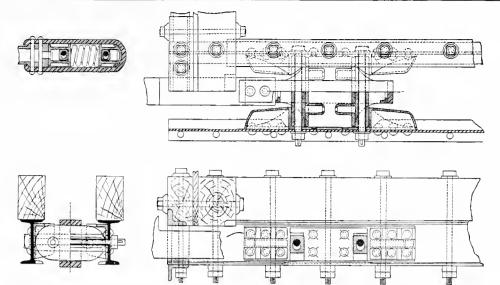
Sessions-Standard Friction Draft Gear, Type E, Applied to Car with Wooden Center Sills.
